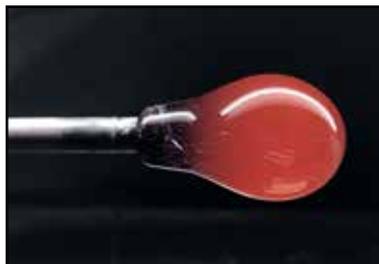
Gathering glass from the melt furnace on stainless steel rod
